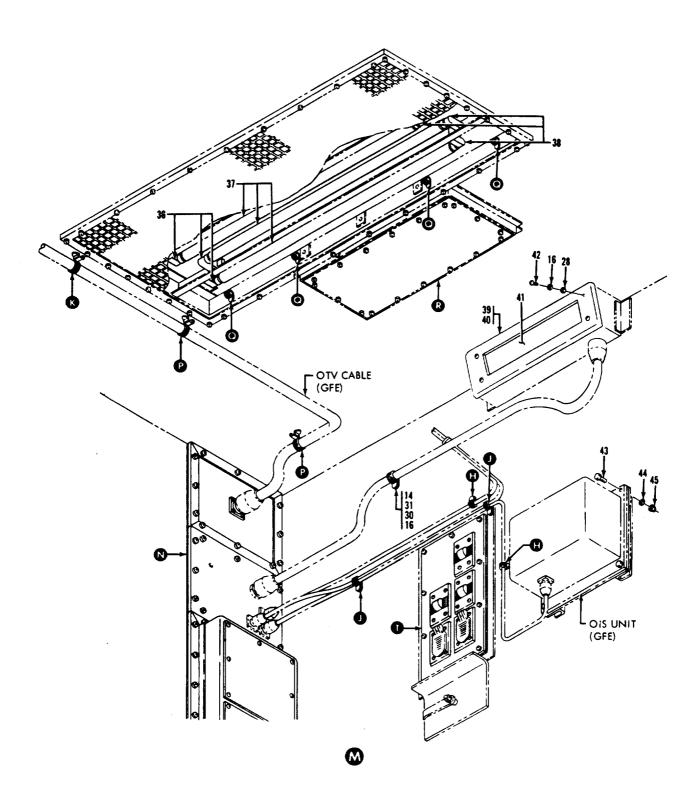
Electrical Equipment Installation (Sheet 5 of 19)
